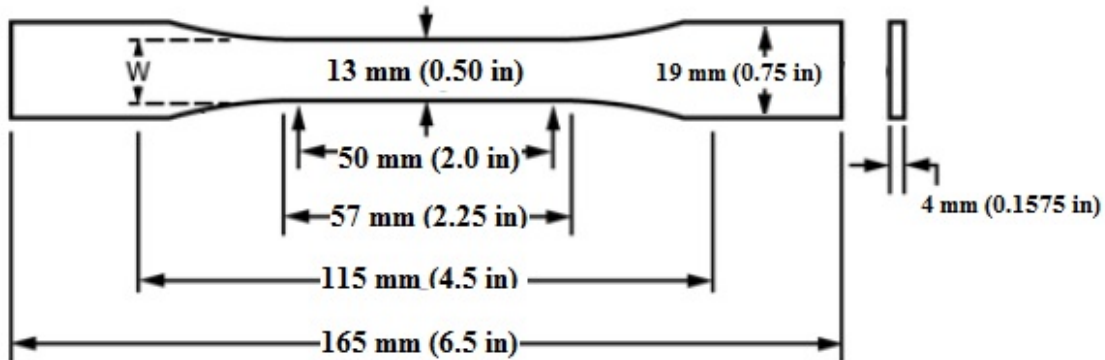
Drawing of Nylon Dog-Bone Tensile Specimen with Dimensions
